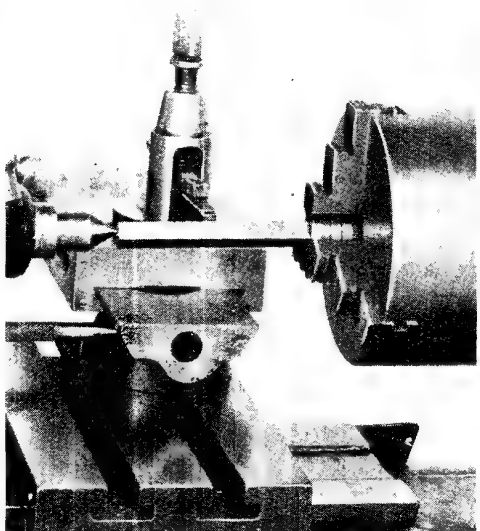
Large spacer washers may often be used, as shown in this illustration, for chucking a square rod in a lathe
